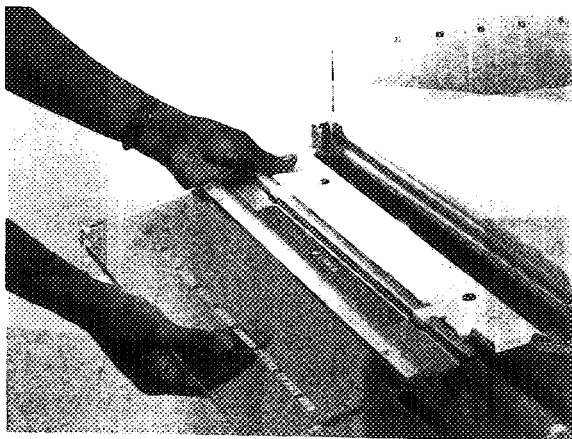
REMOVING BASSINET FRONT PANEL
